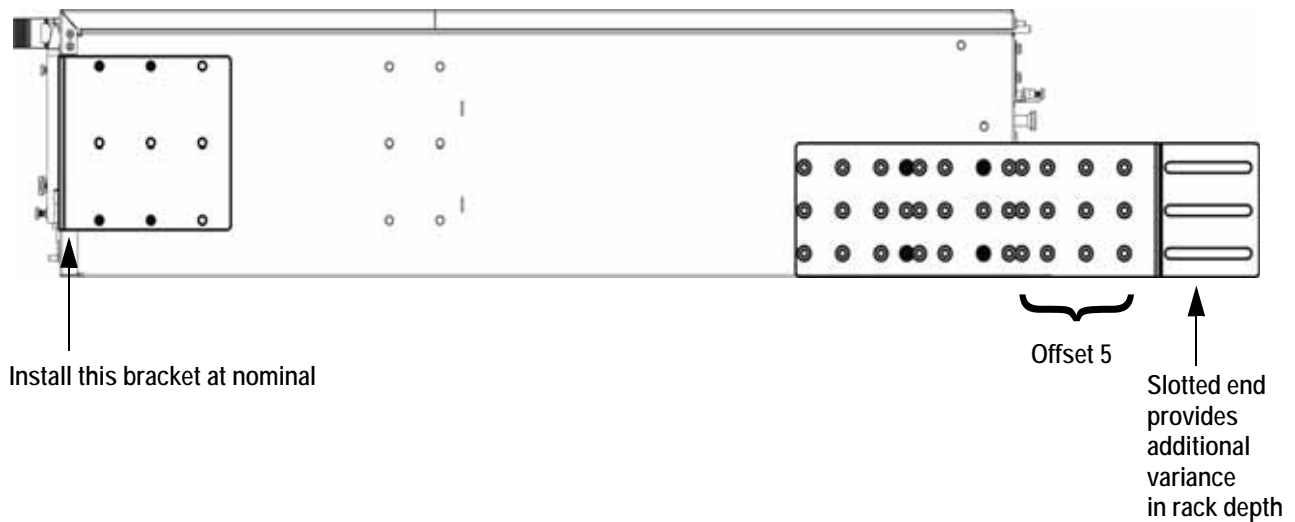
Bracket Mounting for 32.5" to 34" Rack
